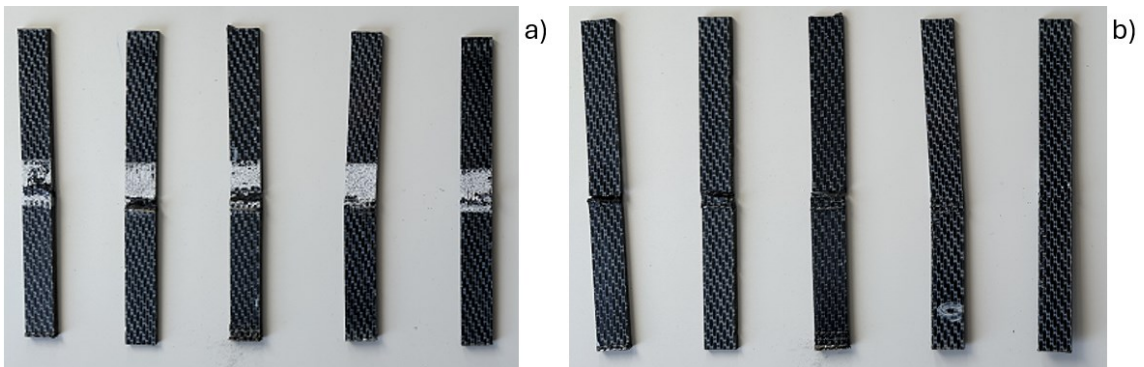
Failed compression test specimens in warp direction a) front face and b) back face
